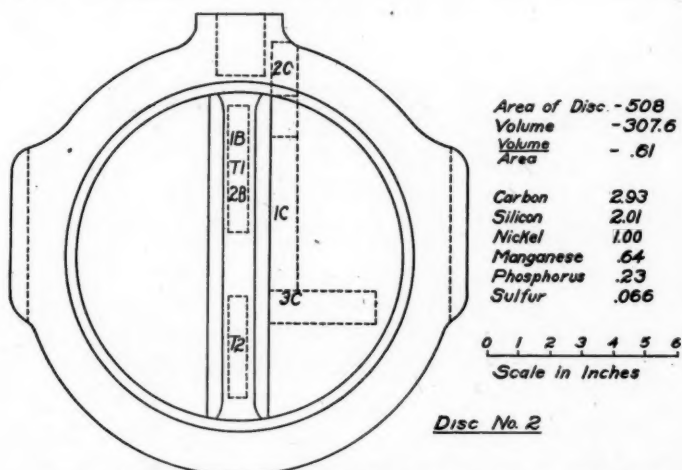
A—VALVE DISC—CASE 2—SHOWING LOCATIONS OF TEST PIECES
